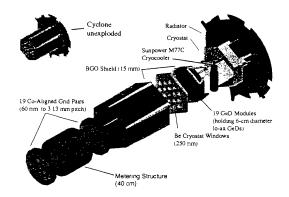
Exploded view of the Cyclone scientific instrument showing the major components. The unexploded view is shown in the upper left corner (courtesy P. Turin, SSL/UCB).
